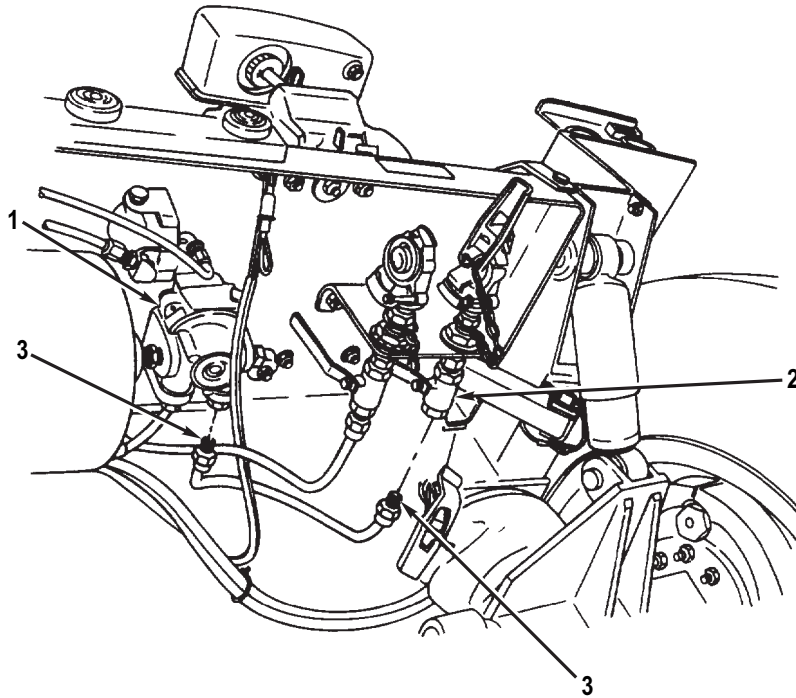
Booster Relay Valve-to-Tee Tube Assembly Replacement.
